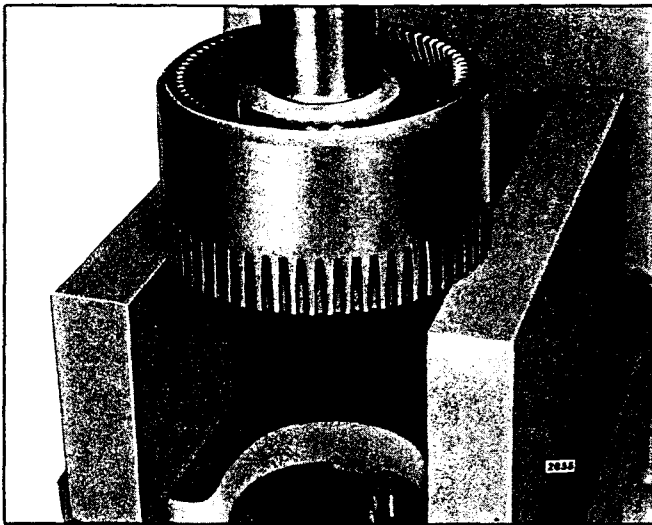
Removing Forward Clutch Piston and Cylinder Assembly from Ring Gear
